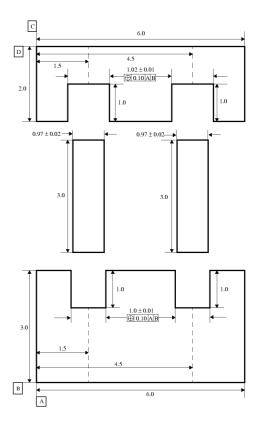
ANSI dimension and tolerance specification for the four part 2D example assembly: 1 Bottom (P1), 2 Shafts (P2 & P3), 1 Cover (P4).
